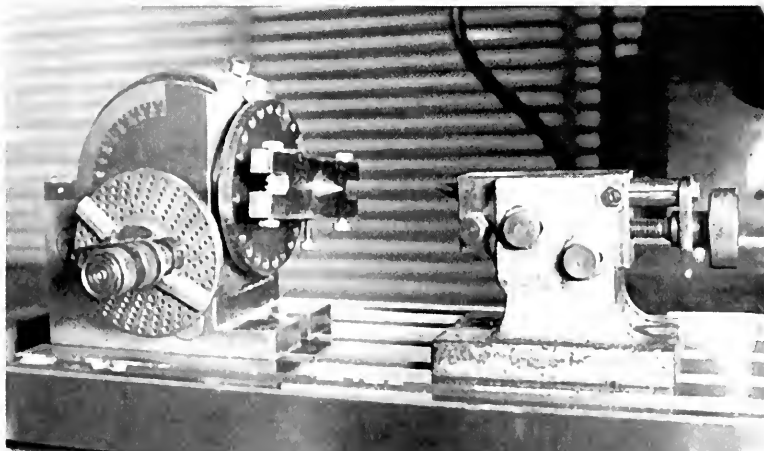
shows a universal dividing head, which consists of the body, the swivel block, the work spindle and its center, the index plate, and the index crank with a latch pin. The workpiece (with one of its ends supported by the center of the work
